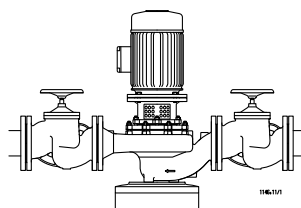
Vertical installation / mounted on pump foot (gray cast iron, accessory), sizes 100-100-160 to 200-200-315
